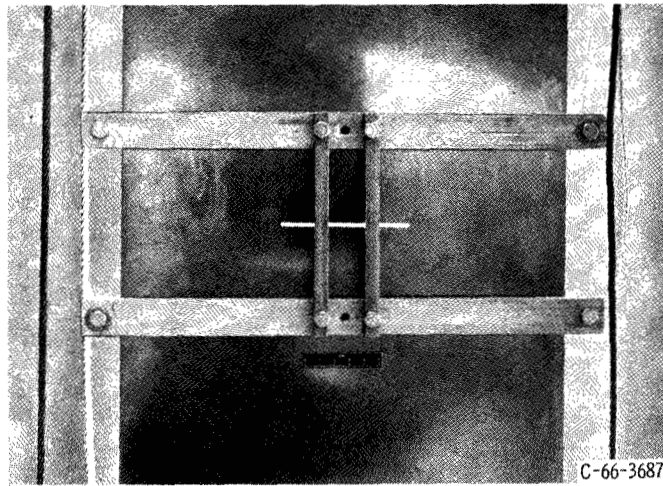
Sheet specimen 12 inches (30.5 cm) wide with antibuckling fixture attached.
